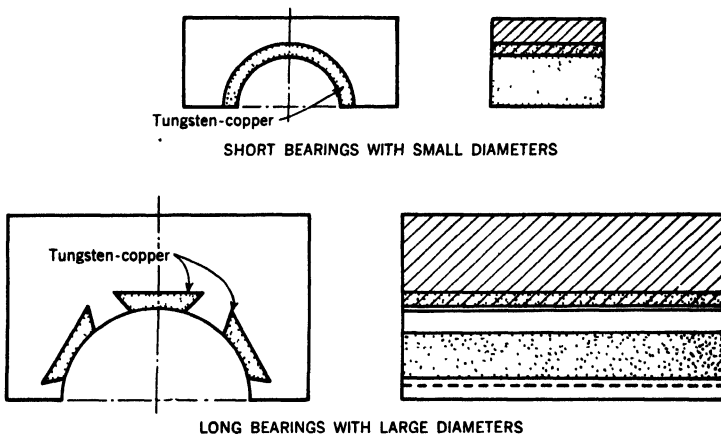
Schematic drawing of tungsten-copper bushing and bearing inserts for current-carrying shafts (according to Hensel, Larsen, and Swazy<sup>27</sup>).
